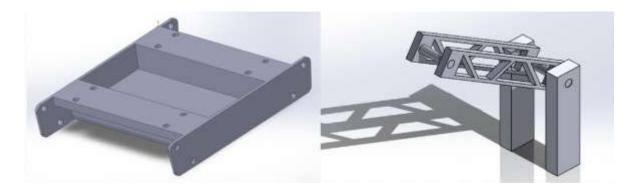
Shows two Solidworks designs: the base piece which was 3D printed and used in our final design (left) and an arm design which helped us model the one we were going to use (right).
